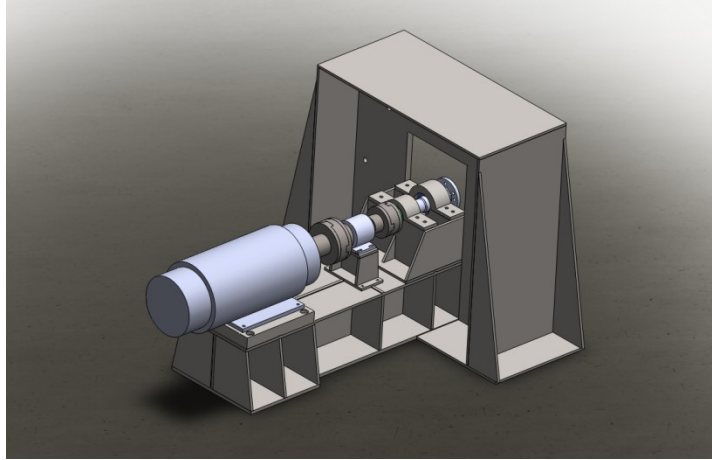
Base Support Structure Design in Full Assembly Supporting Prime Mover, Bearing, and Torque Meter Supports
